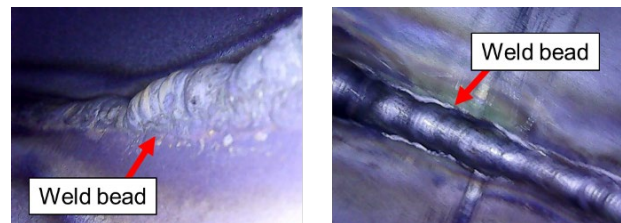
Weld beads inside stainless-steel piping between the beam dump and the beam dump cooling skid (a) before and (b) after pickling and passivation process [3].
